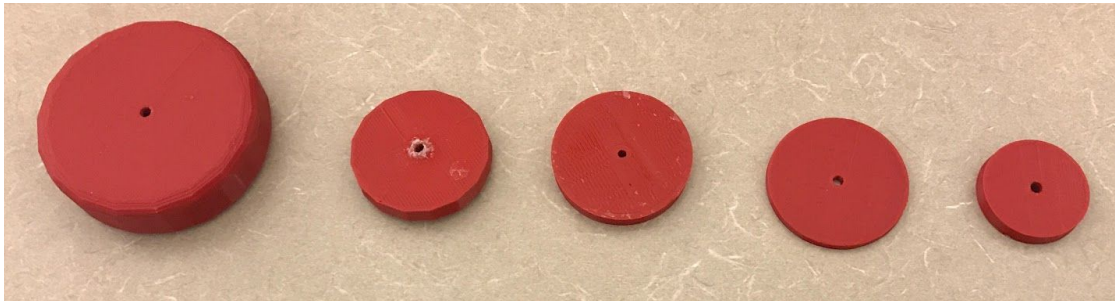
Iterations of 3D printed wheels. The the wheels are lined up from left to right with the left wheel as the oldest design and the right wheel as the newest design. Names from left to right: Big wheel, Polygon wheel, Ideal wheel, Skinny wheel, Small wheel.
